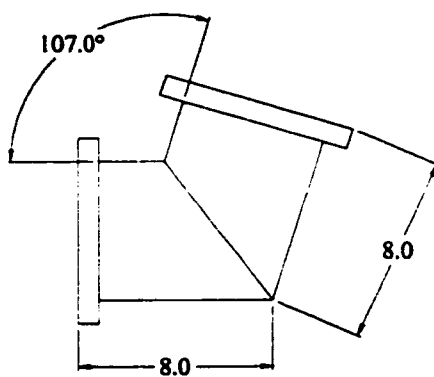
Design drawing for the 107° elbow. This elbow is used to couple the pumping cross to the pumping port on the STM Chamber.
